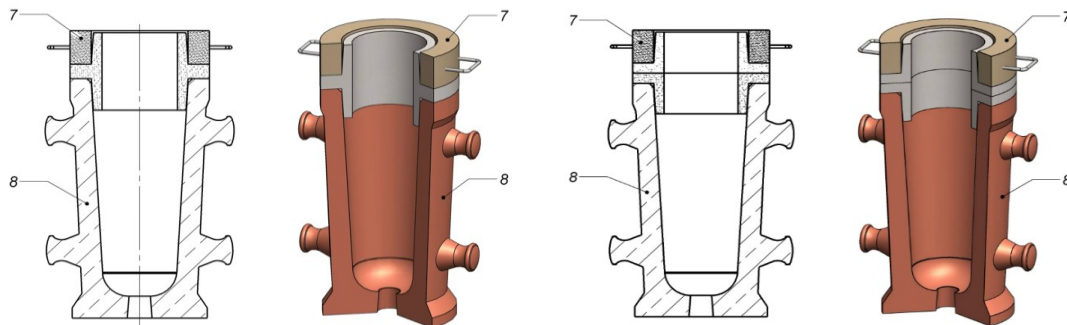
Installation examples of a solid and assembled insert with a weighting element in a circular cross-section mold.
